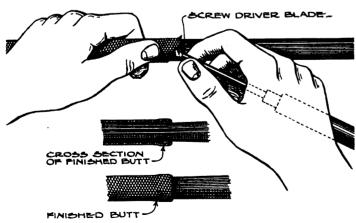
Another method of butting a cable before forming. It is sometimes used in place of the method shown in Figure 43.
